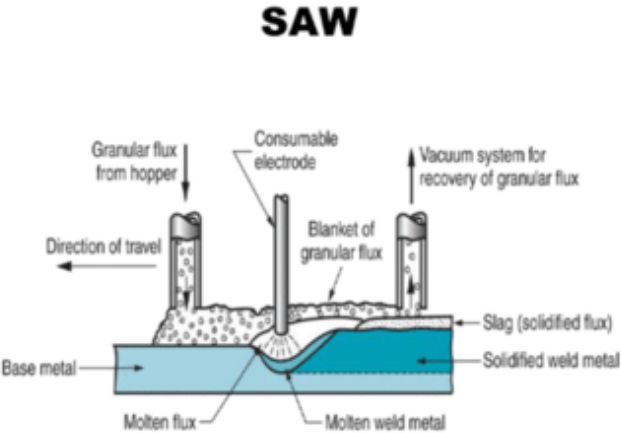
Submerged Arc Welding (SAW) method.[22]
